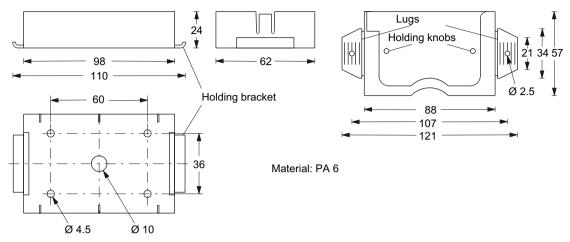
Dimension drawing of spacer 6GT2190-0AA00 with fixing pocket 6GT2190-0AB00
